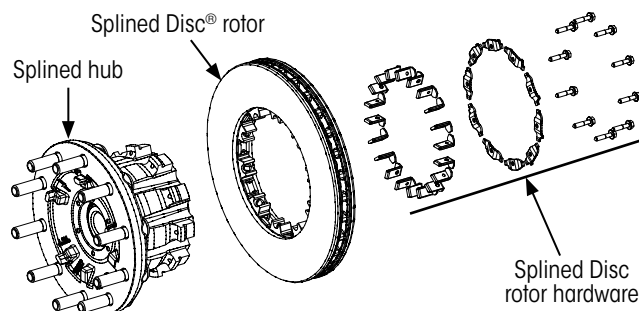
ConMet hub & Bendix Splined Disc rotor assembly
